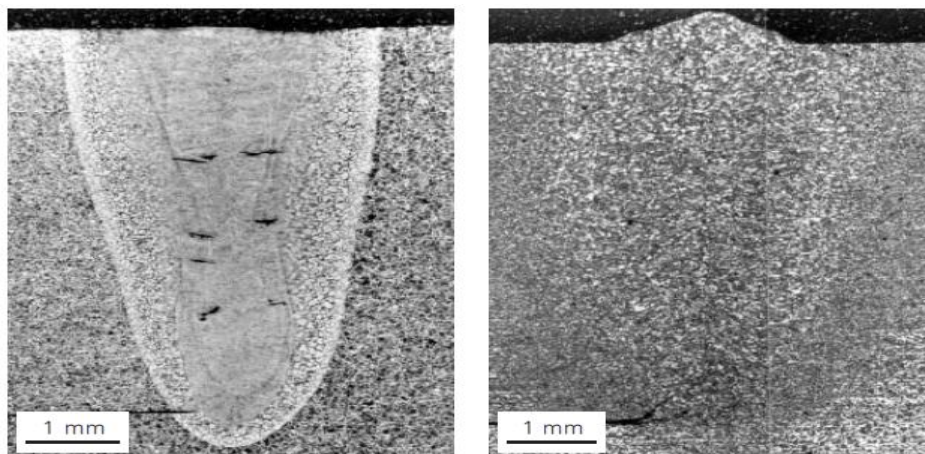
Laser weld joint without induction (left) and with induction (right)⁴⁵
